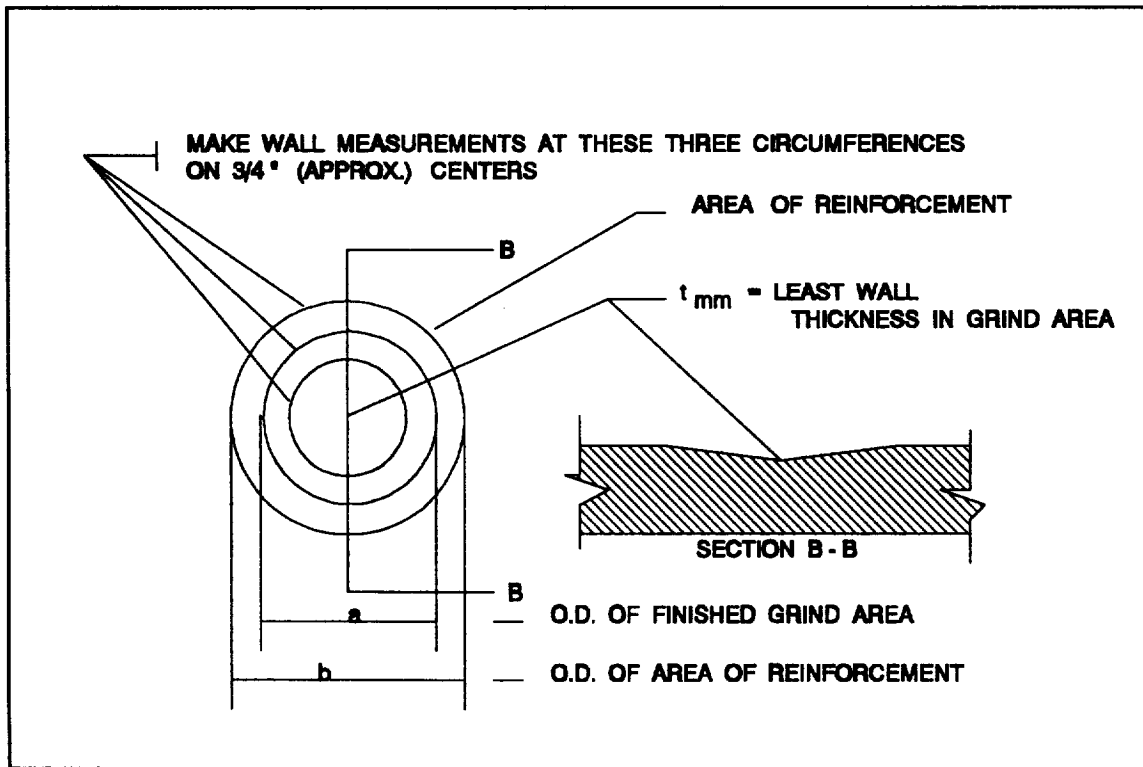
Removal of Cracks by Grinding (FROM U.S. STEEL SPEC.: CP-E-1218)
